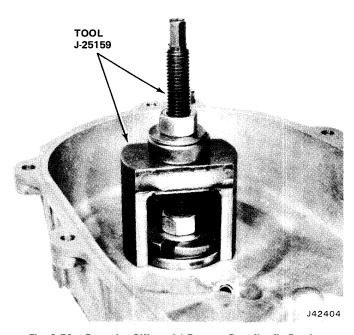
Removing Differential Front or Rear Needle Bearing
